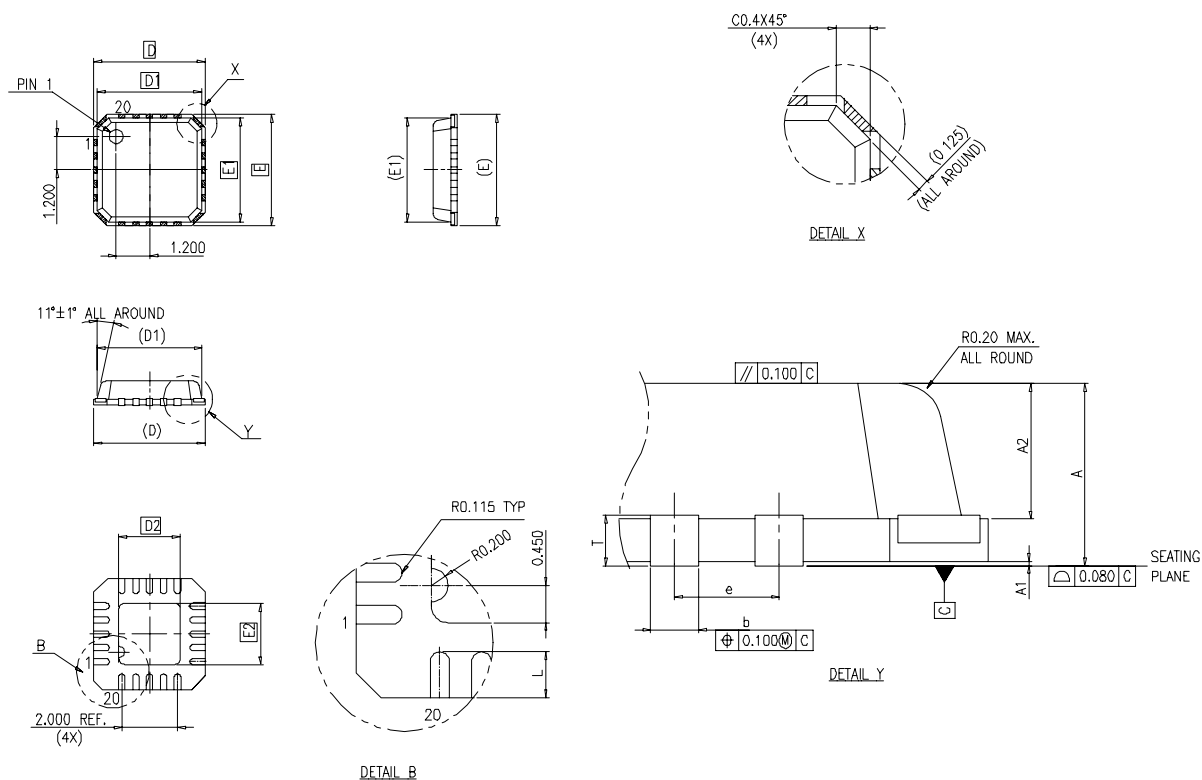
Package dimensions drawing (the actual package has 16 pins)
